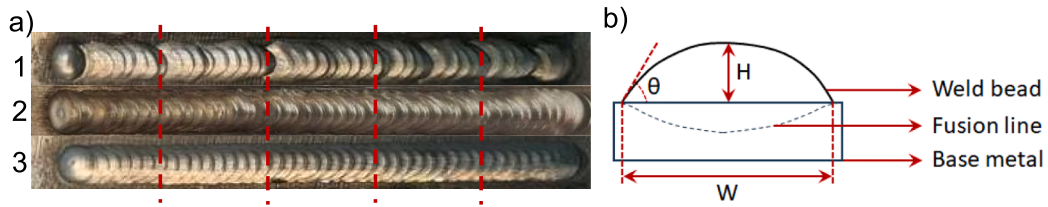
Weld beads obtained from the bead-on-plate experiments using the T-WAAM process in (a), beads 1 and 2 are deposited in the intermittent metal transfer mode and bead 3 in the continuous metal transfer mode. Schematic of the measured weld bead dimensions in (b), where w- width, h- height and θ - wetting angle. The red dashed lines in (a), show the locations where the cross-sections were taken. (For interpretation of the references to colour in this figure legend, the reader is referred to the web version of this article.)
